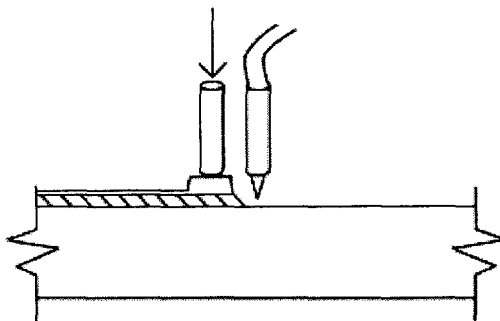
Illustration of Shielded Metal Arc Welding
